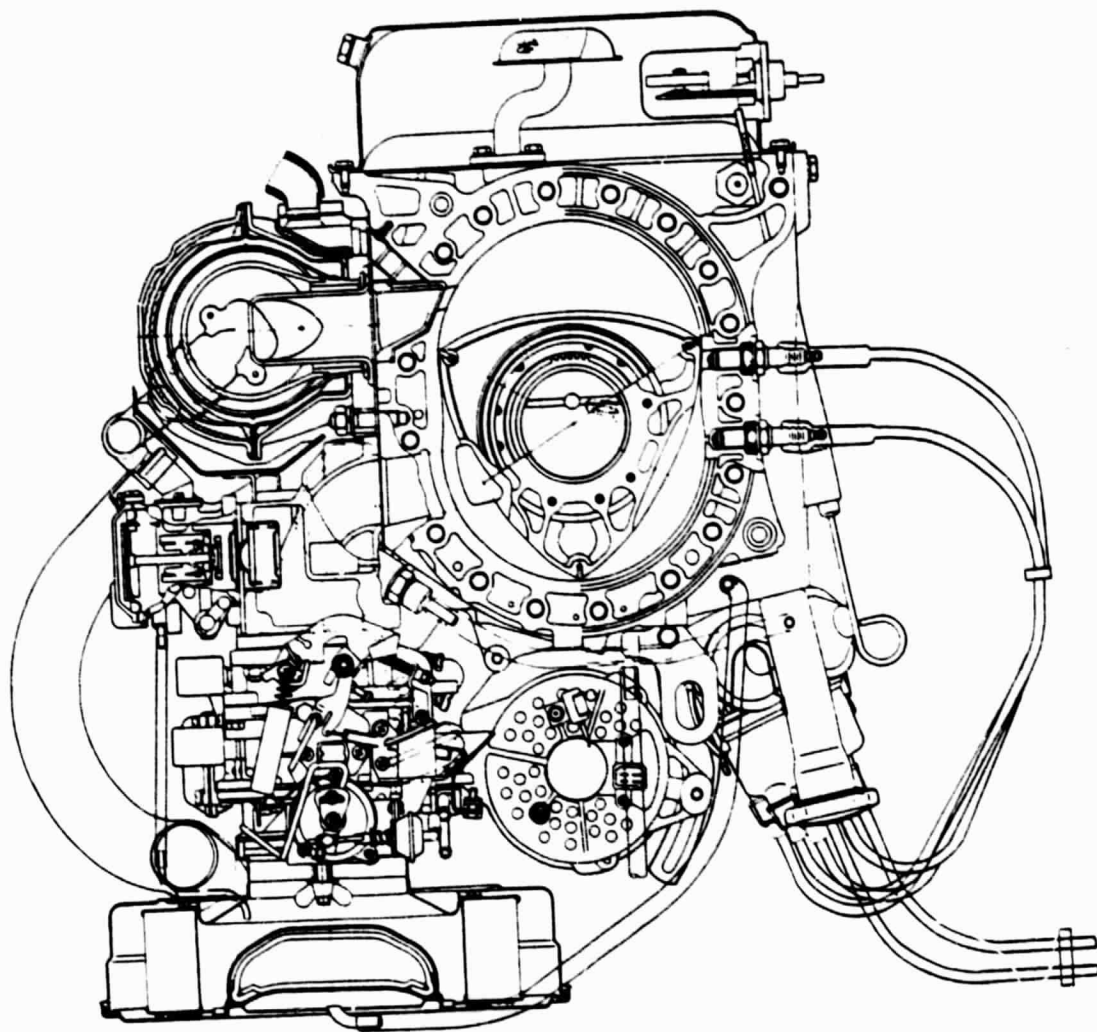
1976 Mazda Rotary Engine (Ref. 65)
